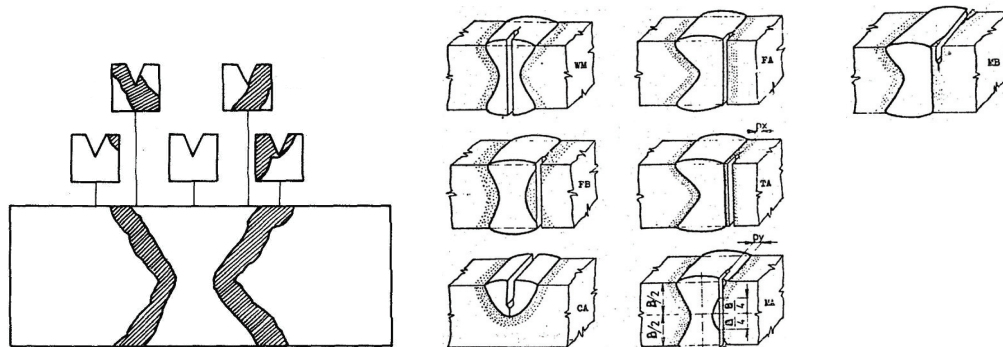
Typical notch positions in fracture mechanics specimens of welded joint
